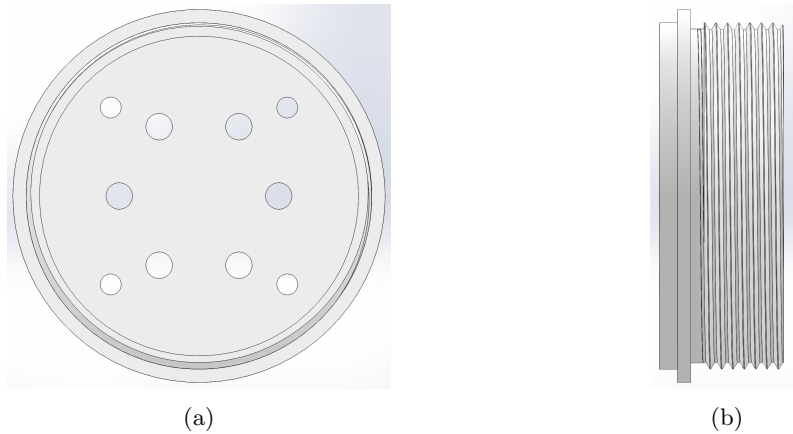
a) Front and b) side views of the rear end cap.
